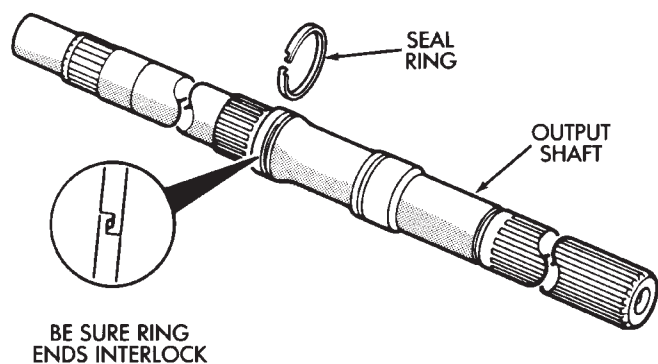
Removing/Installing Shaft Seal Ring J8921-605
